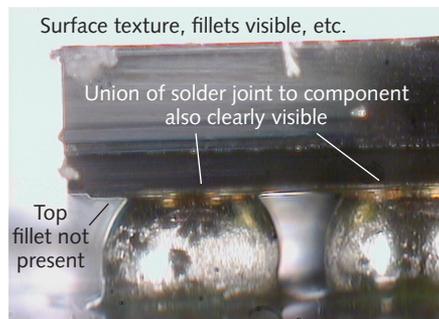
μBGA 800x, well-shaped solder sphere to an X-ray, but fails optical inspection.
